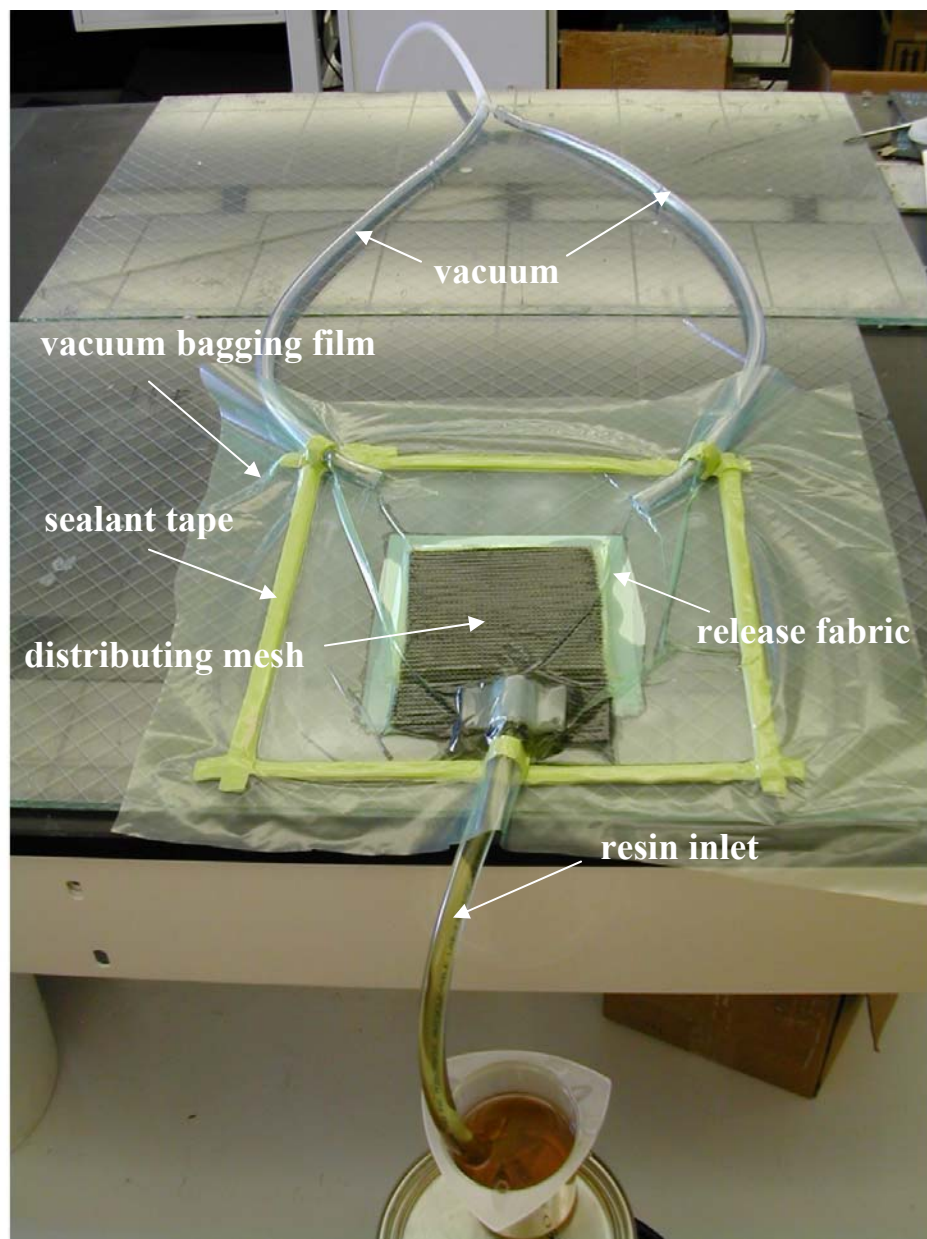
Vacuum assisted resin transfer molding setup in composite fabrication.
